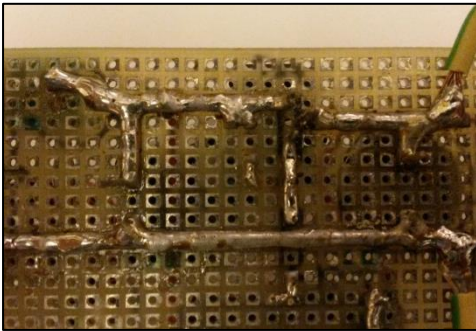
Solder paths made with solder. This practice is not recommended.
